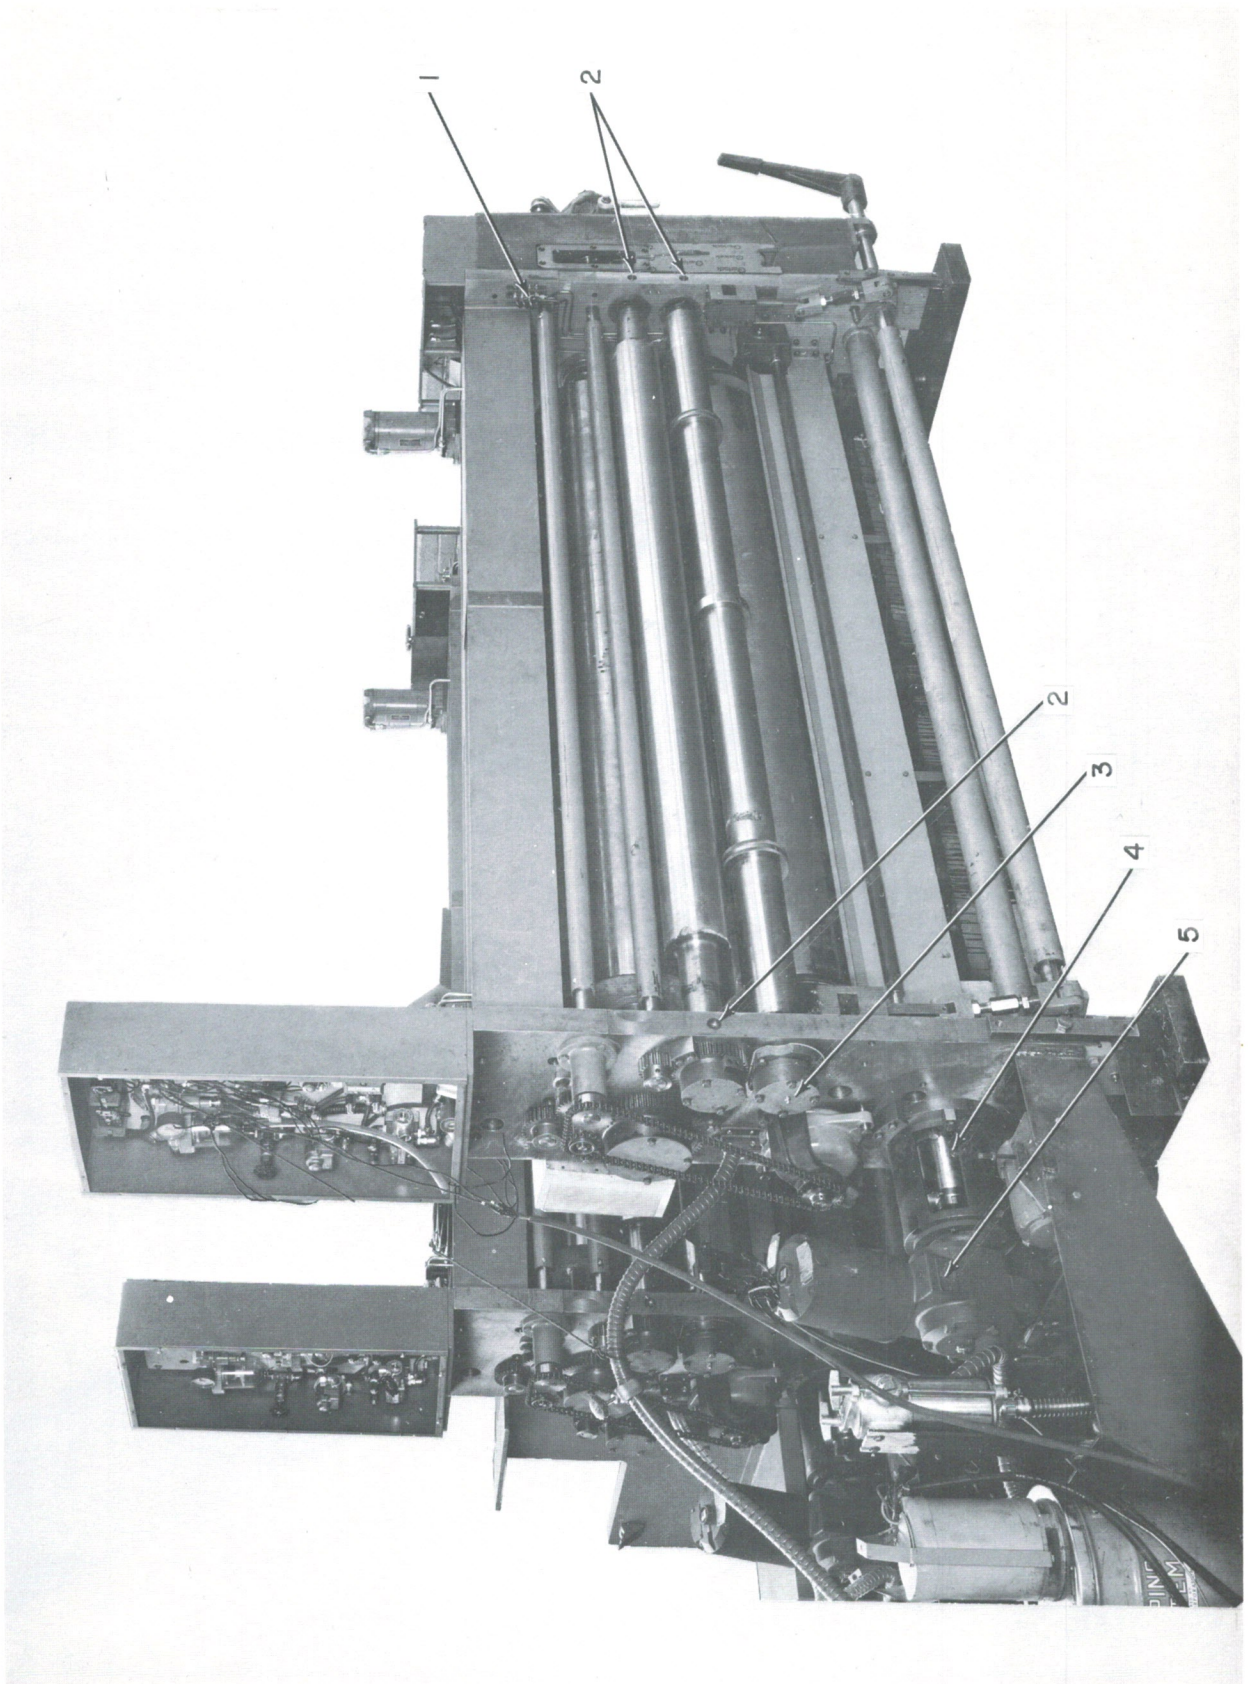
PRINTING UNIT LUBRICATION, DELIVERY END VIEW
